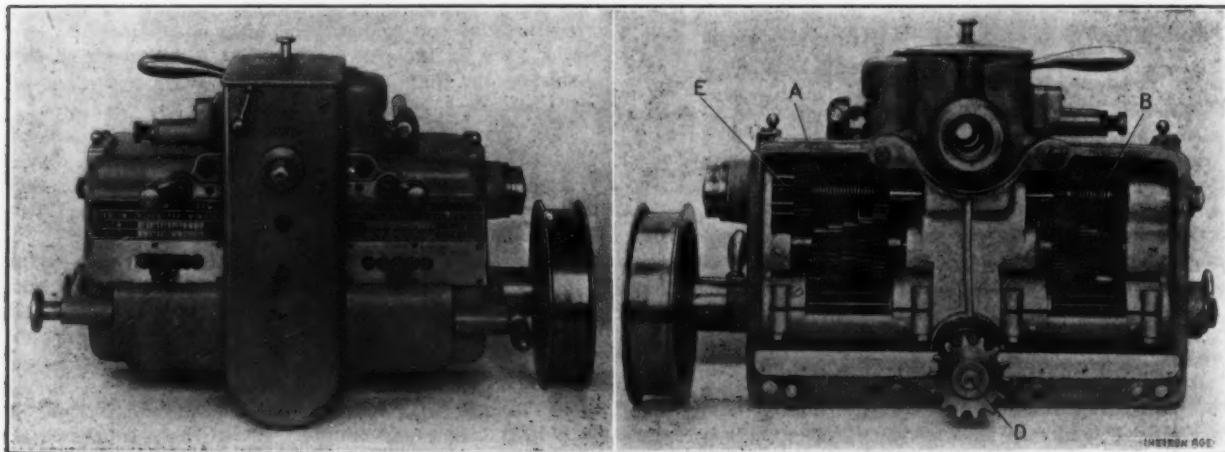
Front and Back Views of the Box Containing the Feed and Speed Changing Gears.
